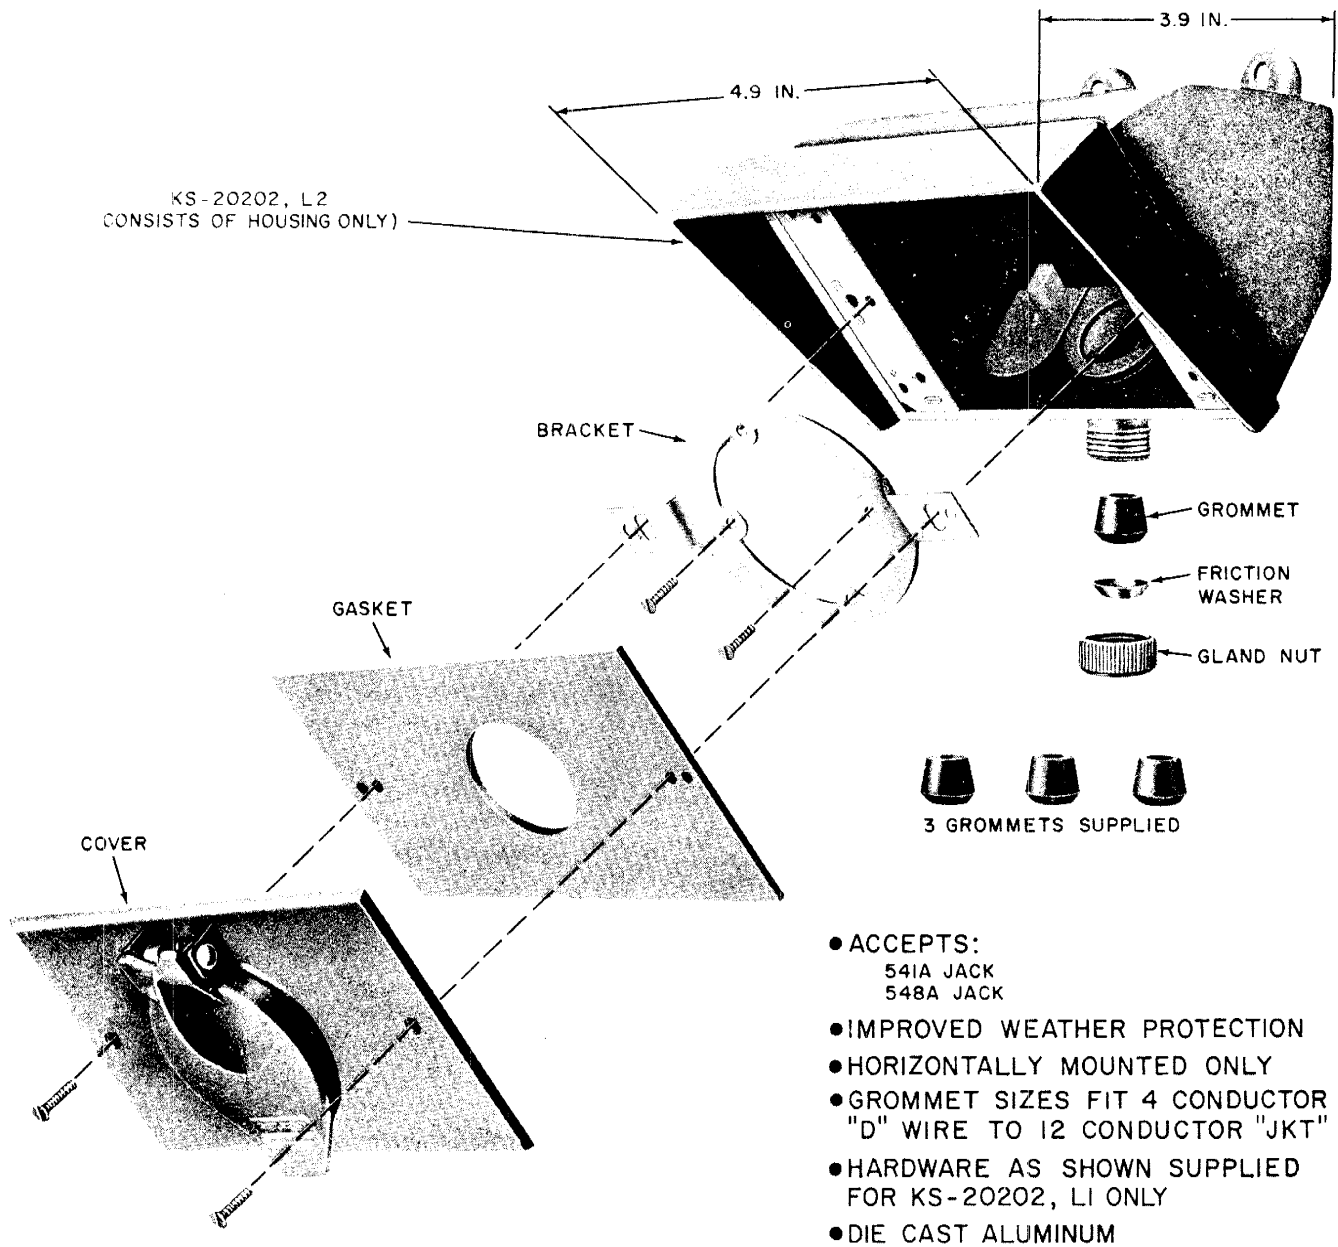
Assembly of KS-20202, Lists 1 and 2 Weatherproof Housing
